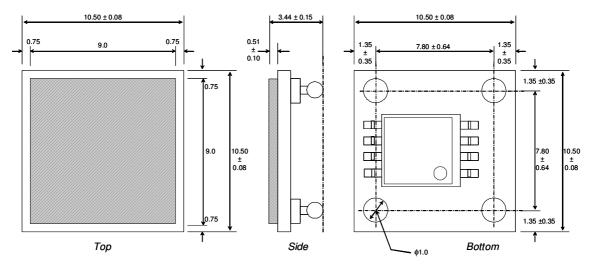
Mechanical Drawing (all dimensions are nominal and in mm)
